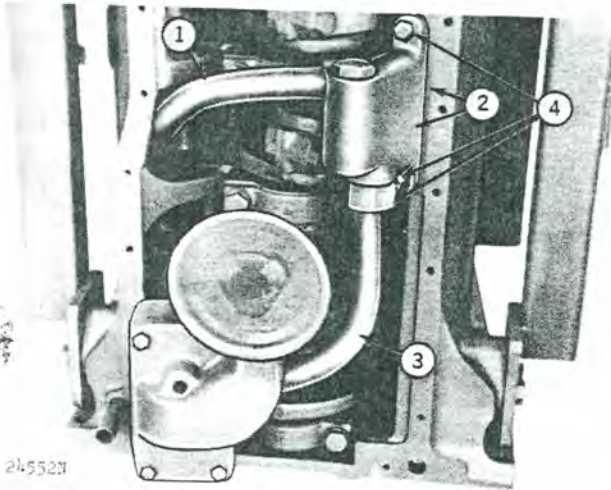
Oil Cooler Bypass Valve Housing Installation
